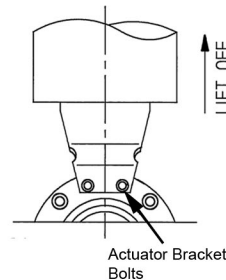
Remove actuator bracket bolts and remove actuator, if fitted. Note the open/ closed position of the valve to enable correct re-assembly.
